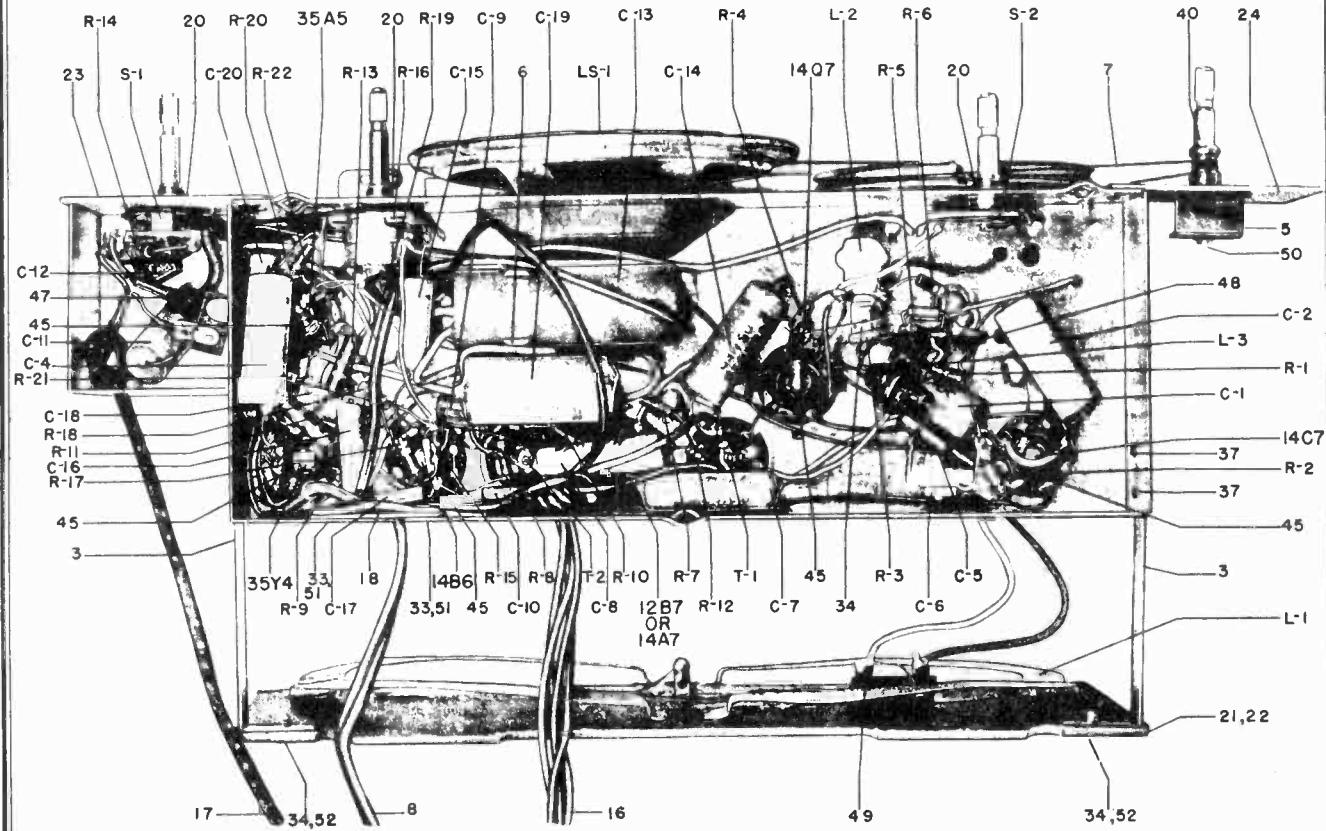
CHASSIS HS-122 PARTS LOCATIONS - BOTTOM VIEW
